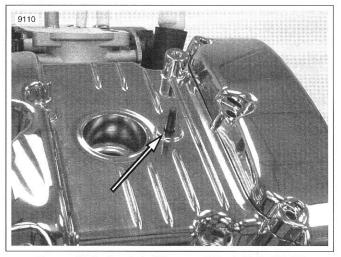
Gasket Alignment Tool (H-D-45340)
